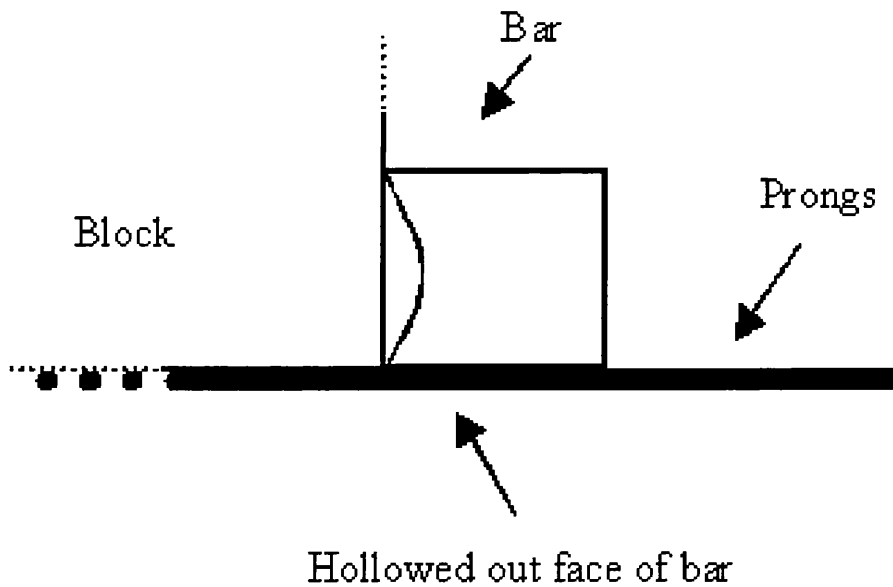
Side view close up of the revised clamp with the hollowed out face.
